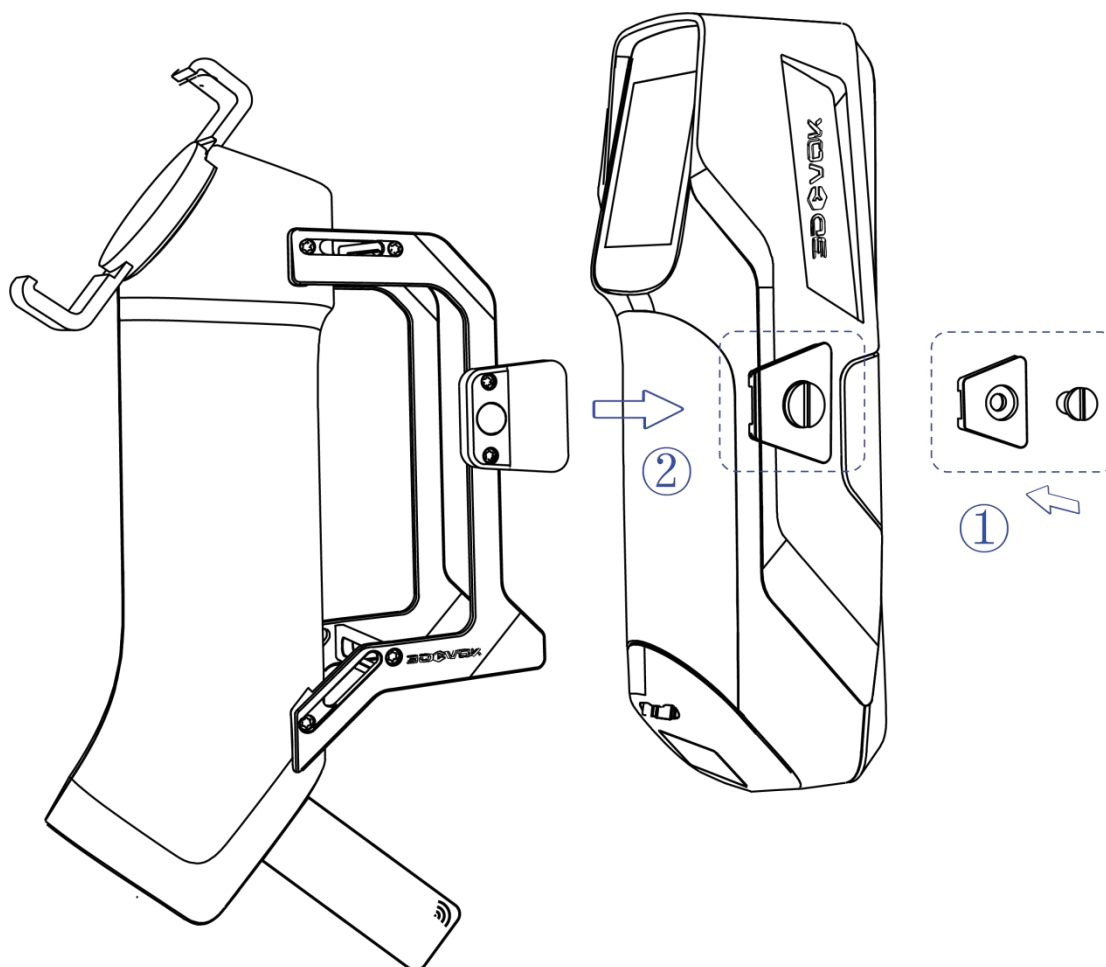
Assembly of Wireless Handle-Network Card Solution
